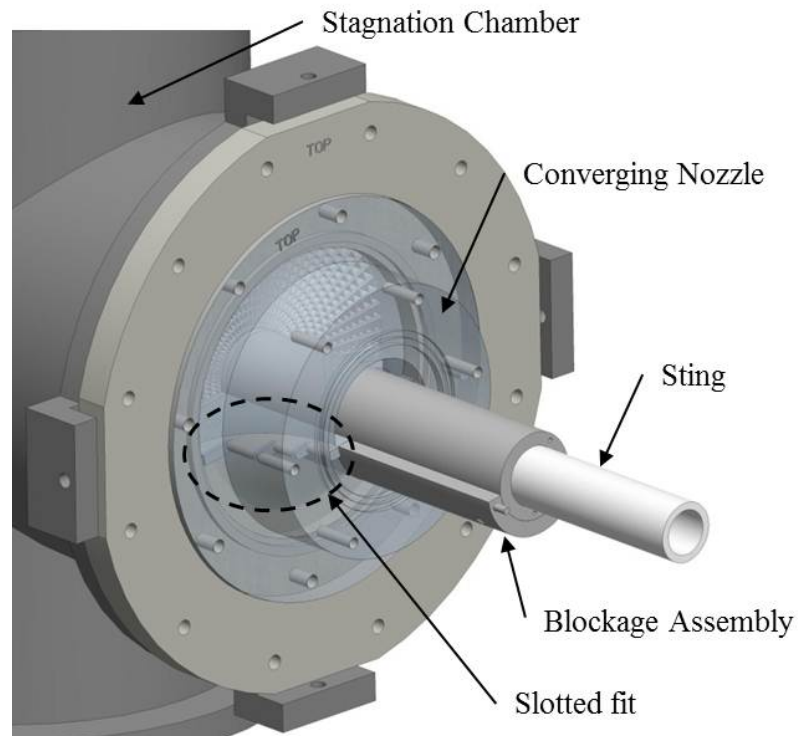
Schematic showing how blockage assembly fits in slots of converging nozzle (shown transparently) to fully block the gearbox region.
